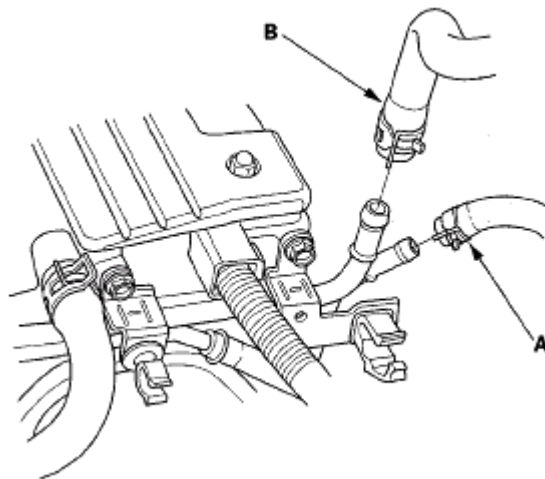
Identifying Evaporative Emission (EVAP) Canister Hose And Brake Booster Vacuum Hose
